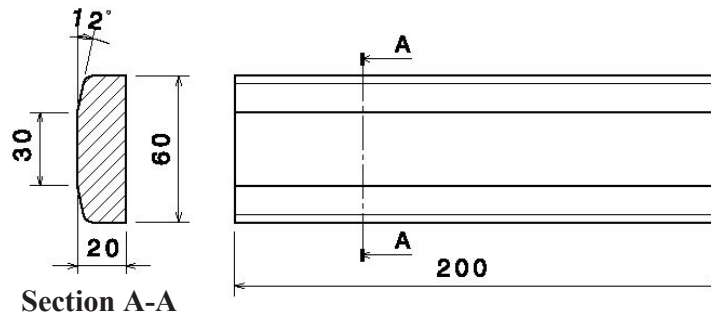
Fatigue test specimens geometry and dimensions (in mm)
